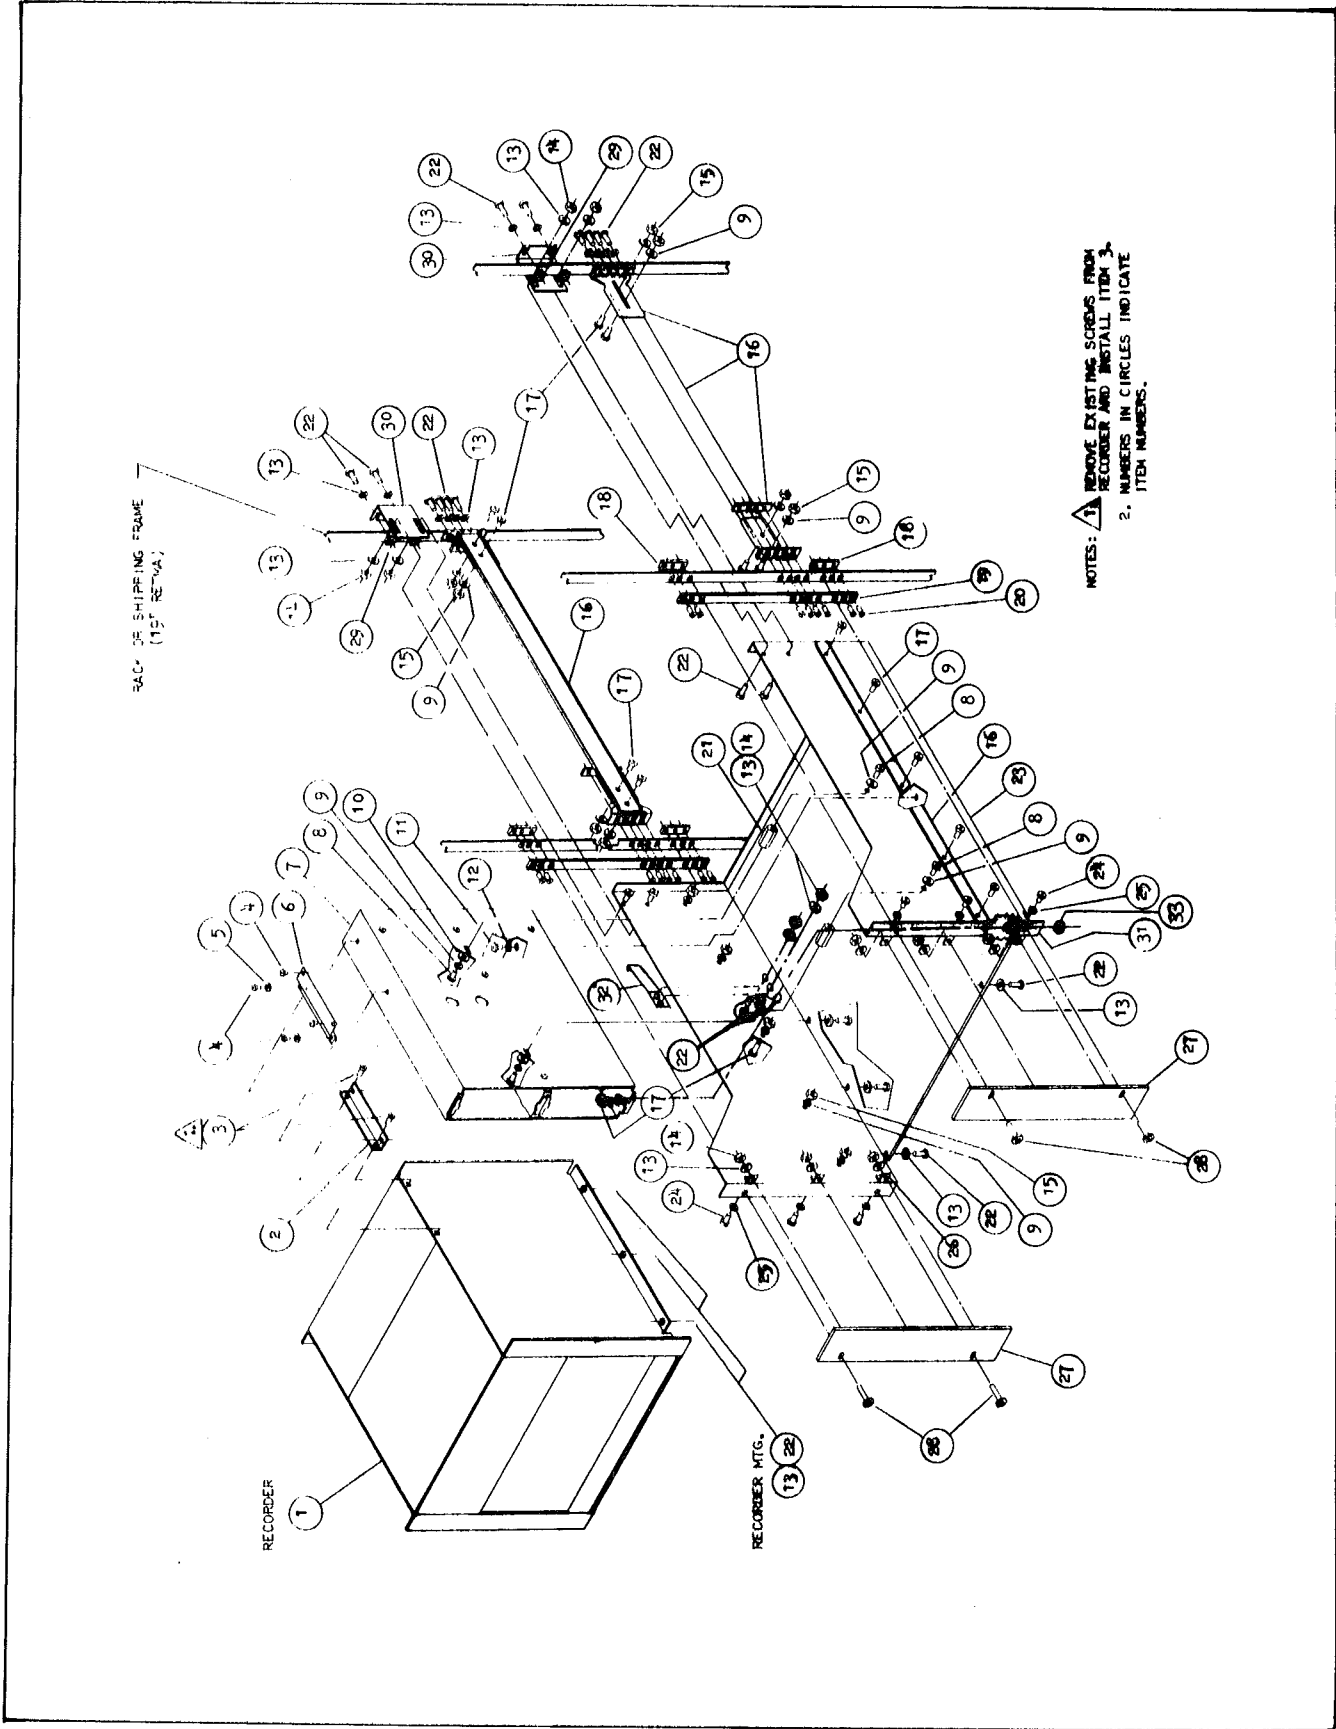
RACK MOUNT INSTALLATION INSTRUCTIONS - RECORDER WITH 2-CHANNEL PREAMP CAGE (687363)
